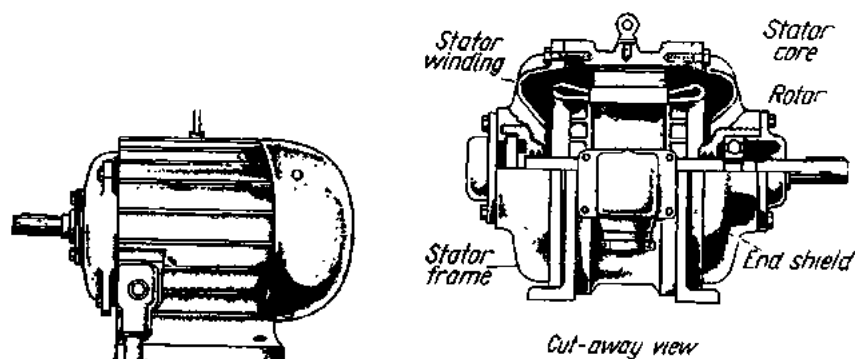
General and cut-away views of a squirrel-cage induction motor
